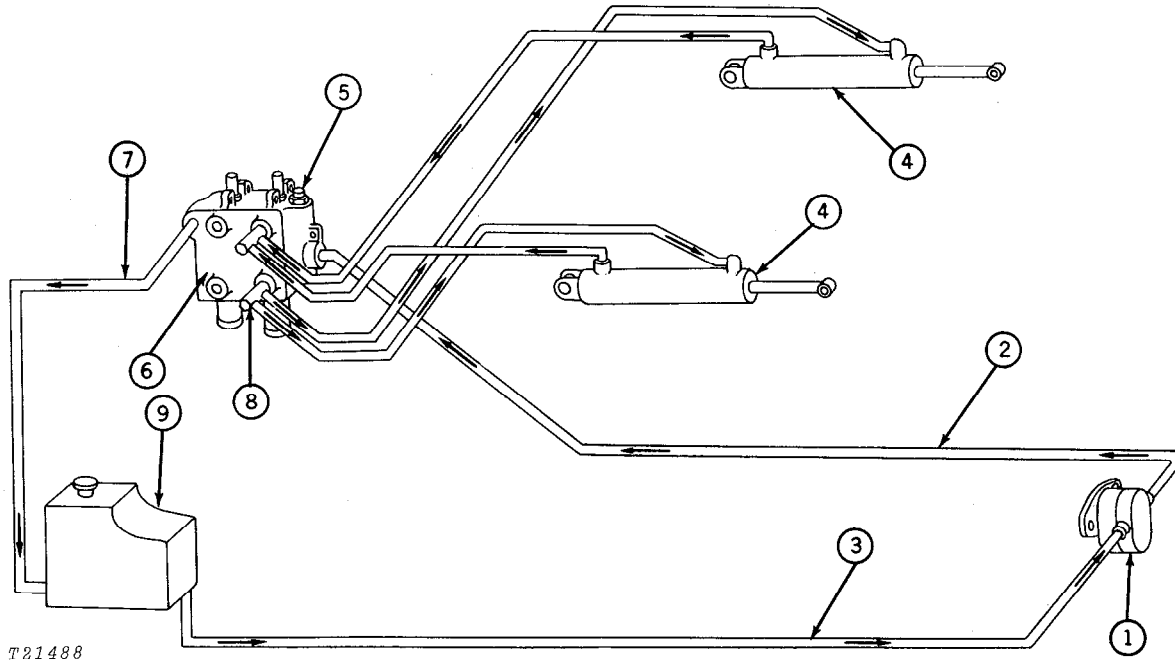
Crawler Loader with Ripper and Drott Bucket
